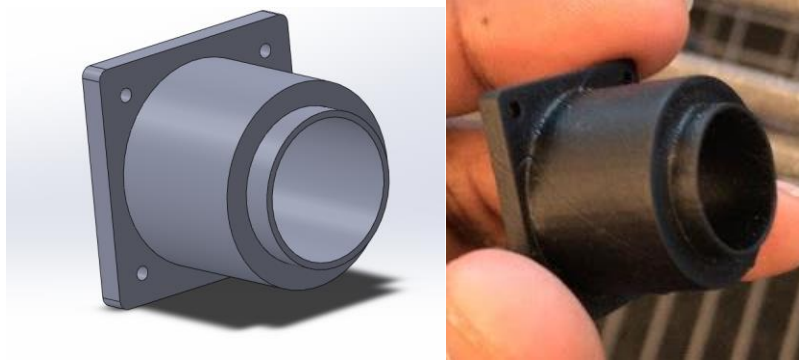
5: The CAD model of the housing of 30 mm focal length lens and the 3-D printed part on the right
